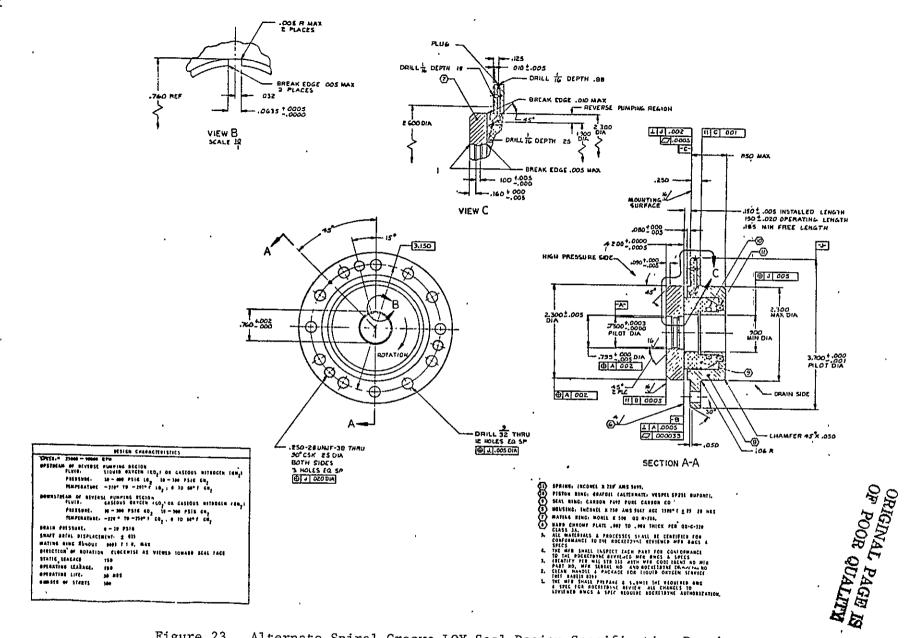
Alternate Spiral Groove LOX Seal Design Specification Drawing
